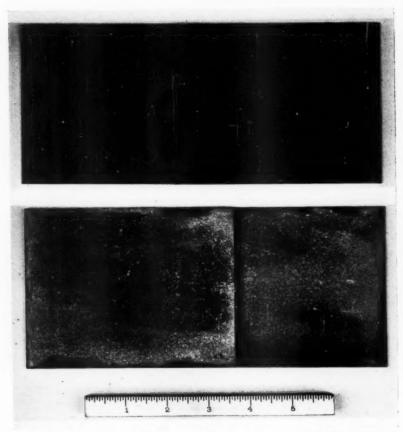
Top and Bottom Surfaces of a Spot-Welded AZ31A Magnesium Specimen, 0.064 in. Thick, After Being Exposed to Rural Atmospheric Conditions for a Period of 1 yr.
